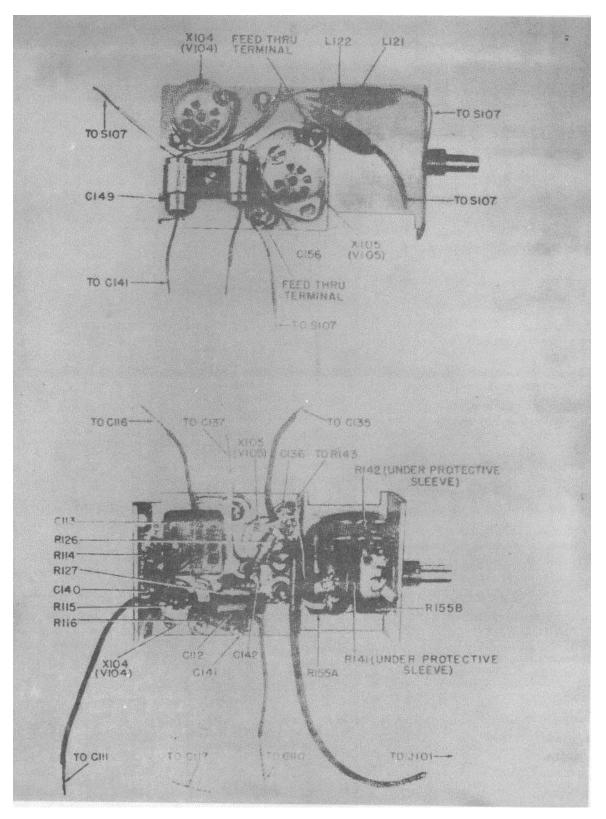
Top and Bottom Views of Buffer-Amplifier Tube Shelf
